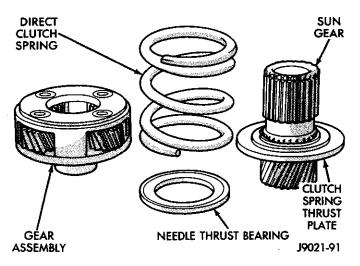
Planet Carrier, Sun Gear And Clutch Spring
